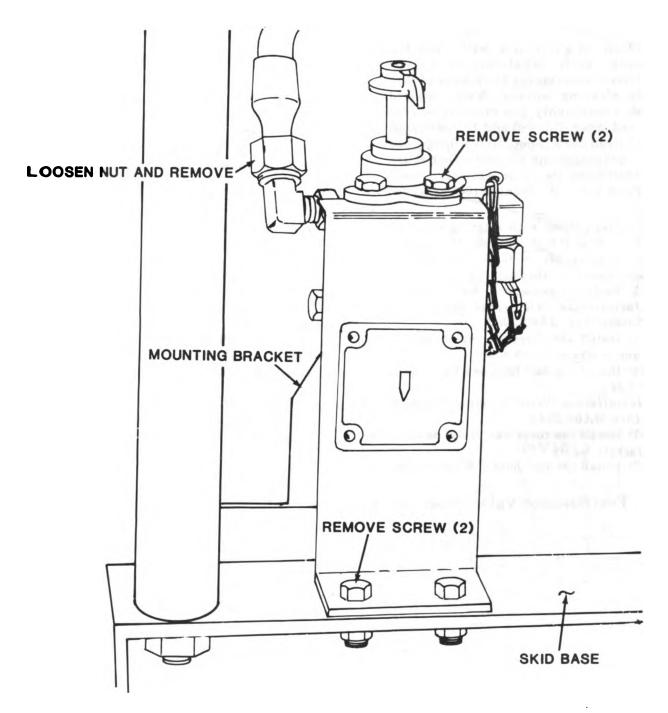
THREE-WAY VALVE FUEL FILTER, FUEL VALVE MOUNTING BRACKET, REMOVAL AND INSTALLATION (ALL SERIAL NUMBERS EXCEPT MA68-0001 THRU MA68-2987) (MODEL MEP-018A)
